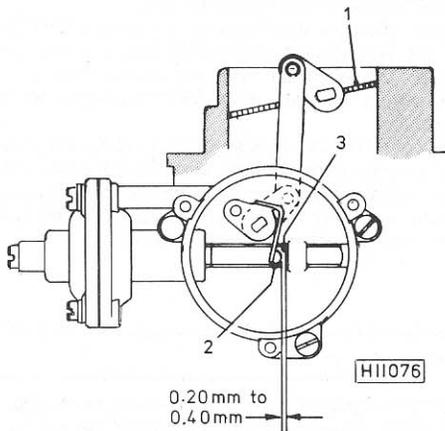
Checking the shaft arm to rod clearance (DGAS types) (Sec 9)
